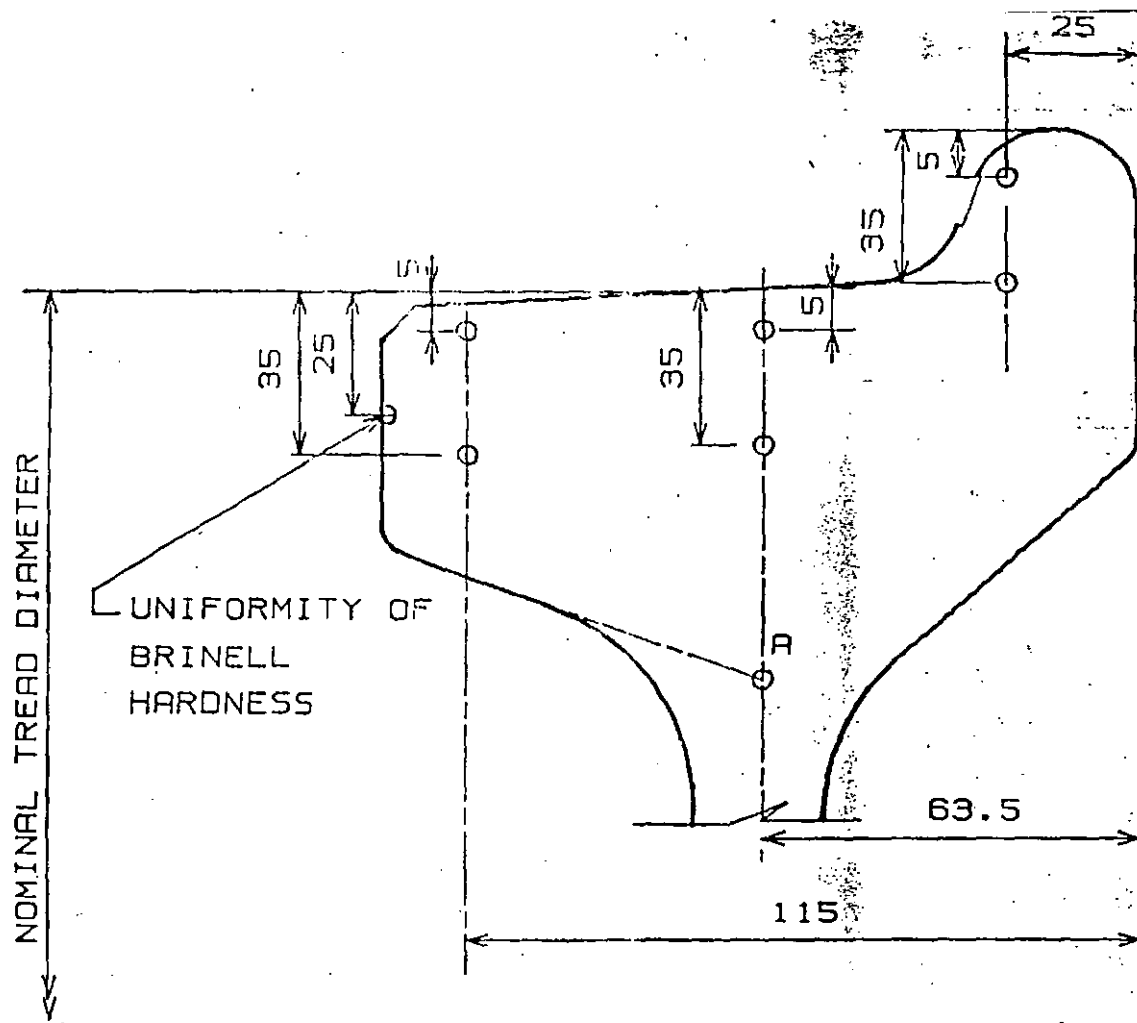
POSITION OF TENSILE AND IMPACT TEST PIECES
